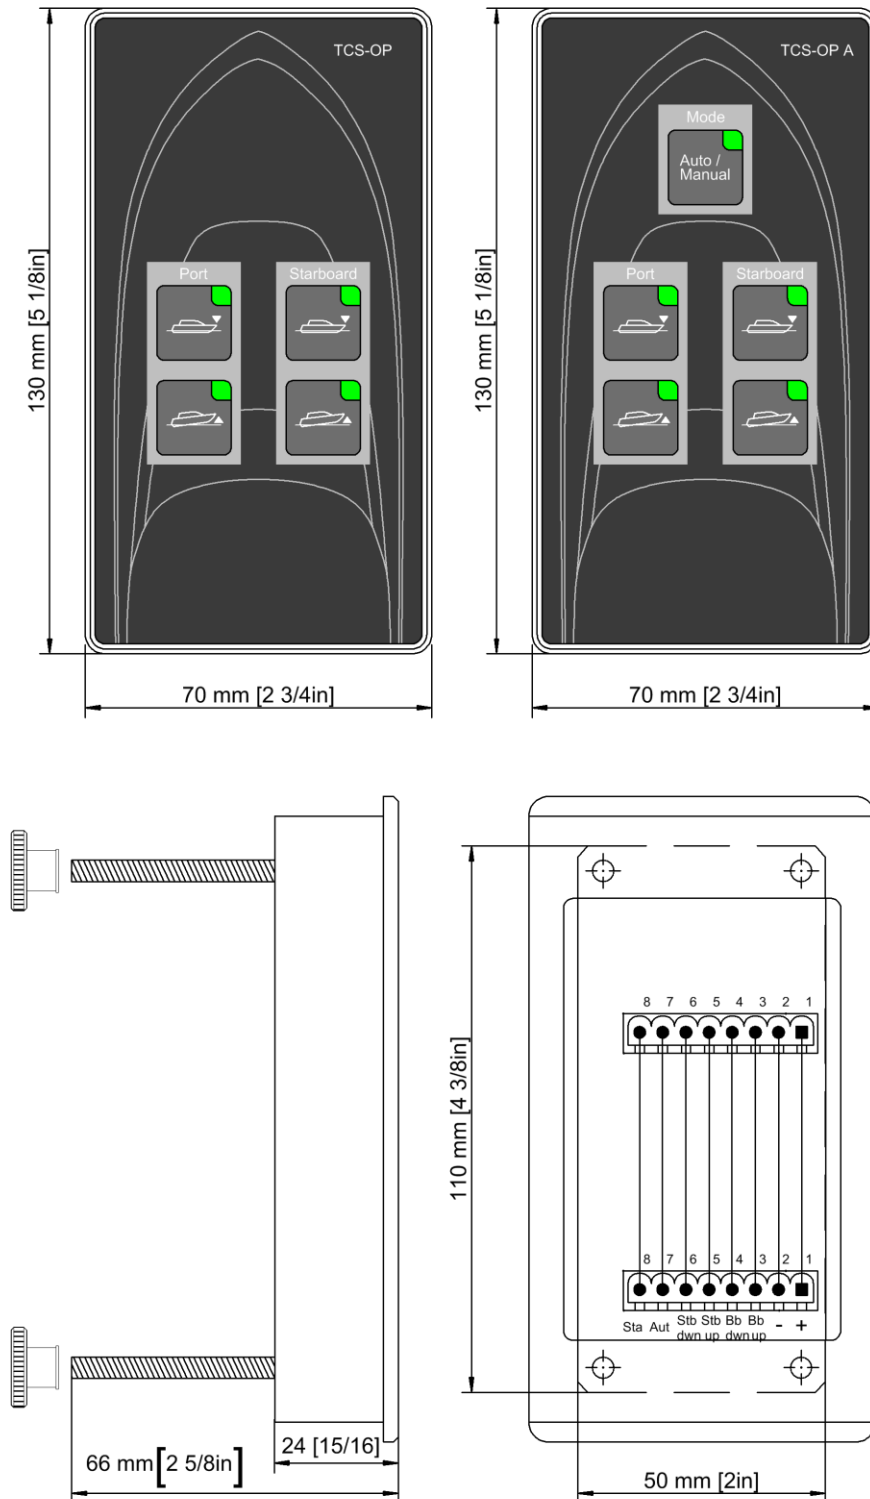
AHD-TCS OP A: Dimensions in millimeters
